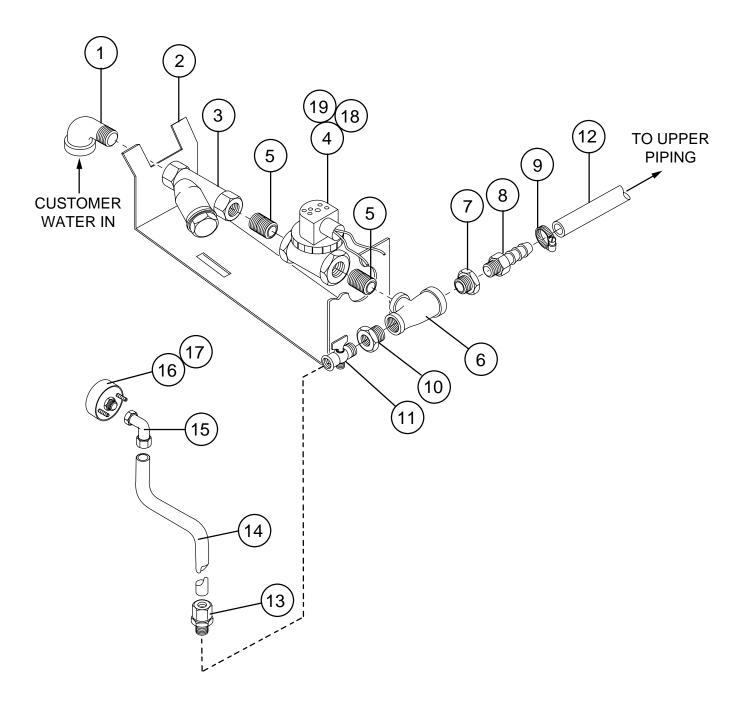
MH-6N/6L Only Lower Fill Piping Assembly
